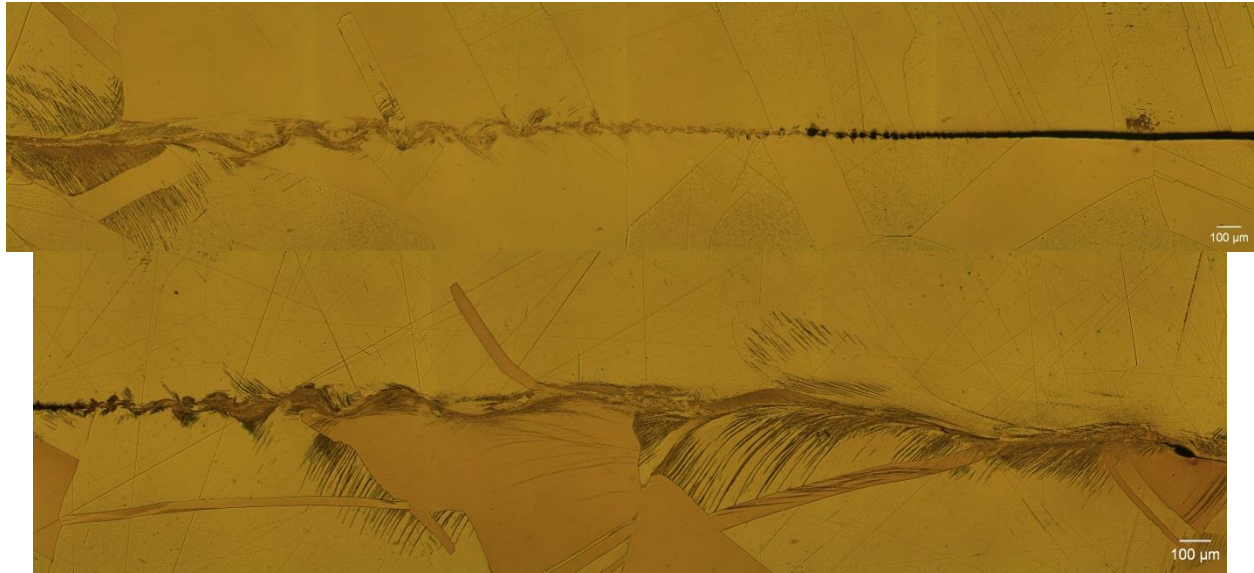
Optical images of 0.032" to 0.093" annealed copper weld.
